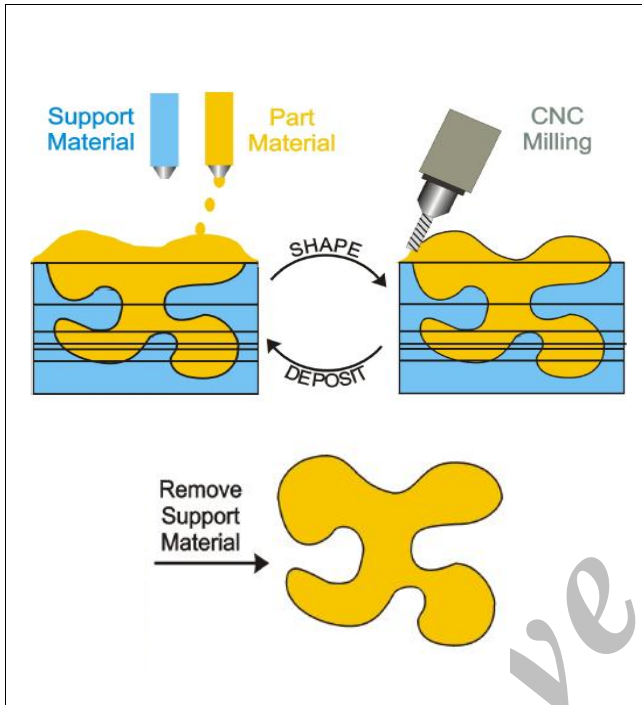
Microcasting Shape-Deposition-Manufacturing (SDM) [6]
